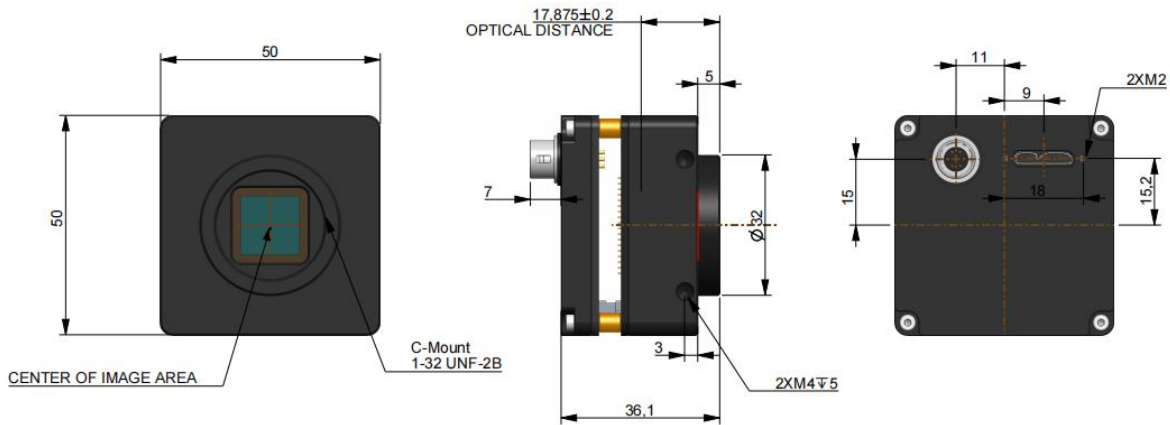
51 Dimensions of OEM3 camera housing (mm)
